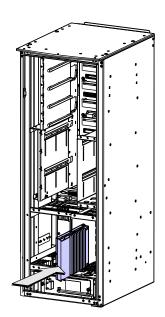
Removing VXxx unit cover and installing VXxx unit in Mini Outdoor cabinet
